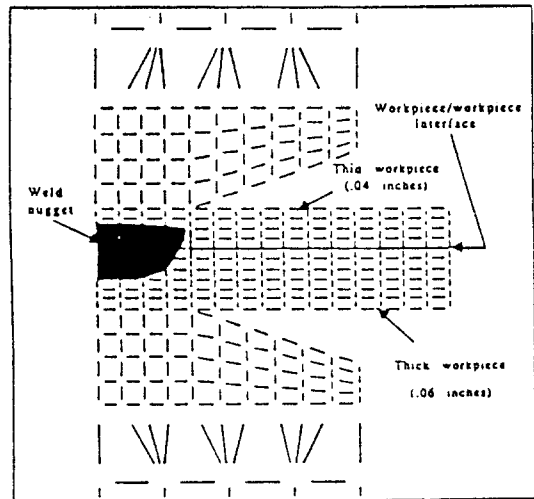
Weld nugget geometry obtained for unequal thickness workpiece after 7 weld cycles (Current = 8000 amps)
